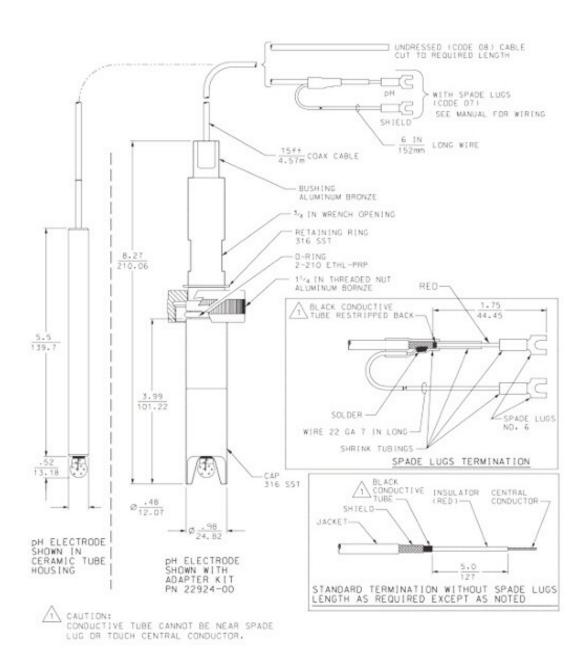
Dimensional Drawing for Rosemount 328A and Optional Mounting Adapter Hardware Kit (PN 22924-00)
